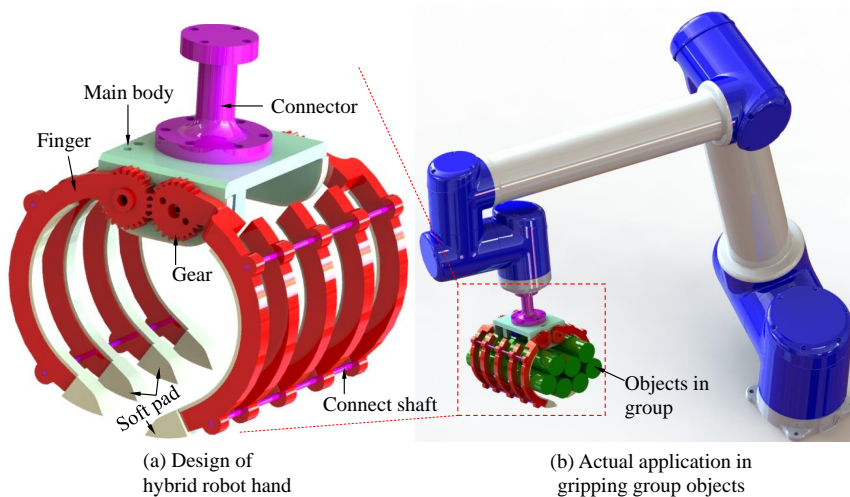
Design of the hybrid robot hand for grasping one group of the objects. (a) The assembly design of the hybrid robotic hand. (b) Fixing the robot hand on the robot arm. In this picture, the hand holds one group of objects between the fingers
